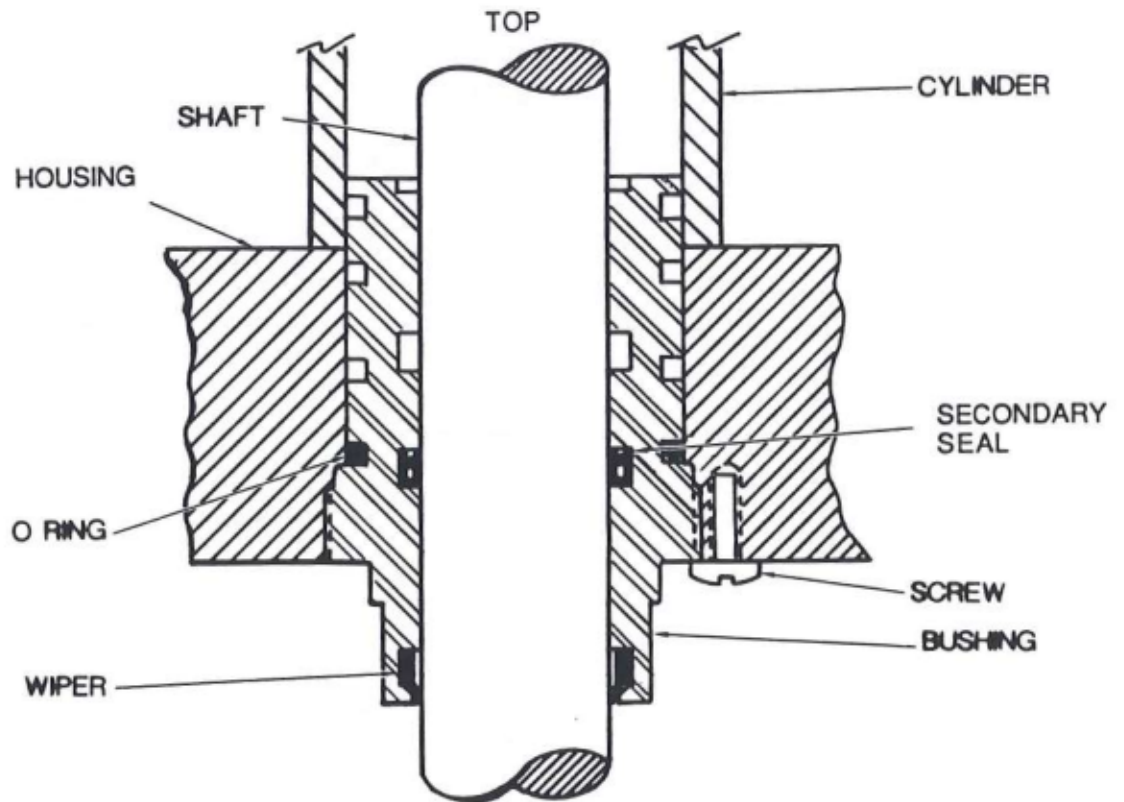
B Assembled Seal, O-Ring, Wiper (common to all), and Bushing Push Type
